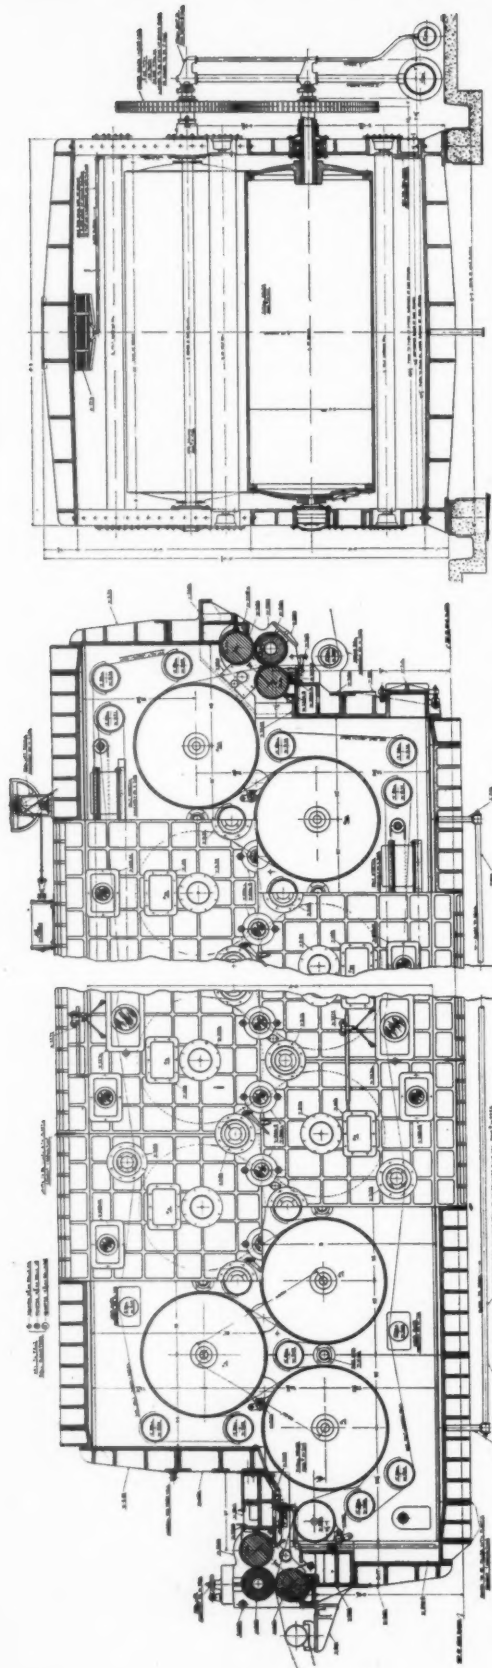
Partial side elevation and cross section of Minton Vacuum Dryer.
